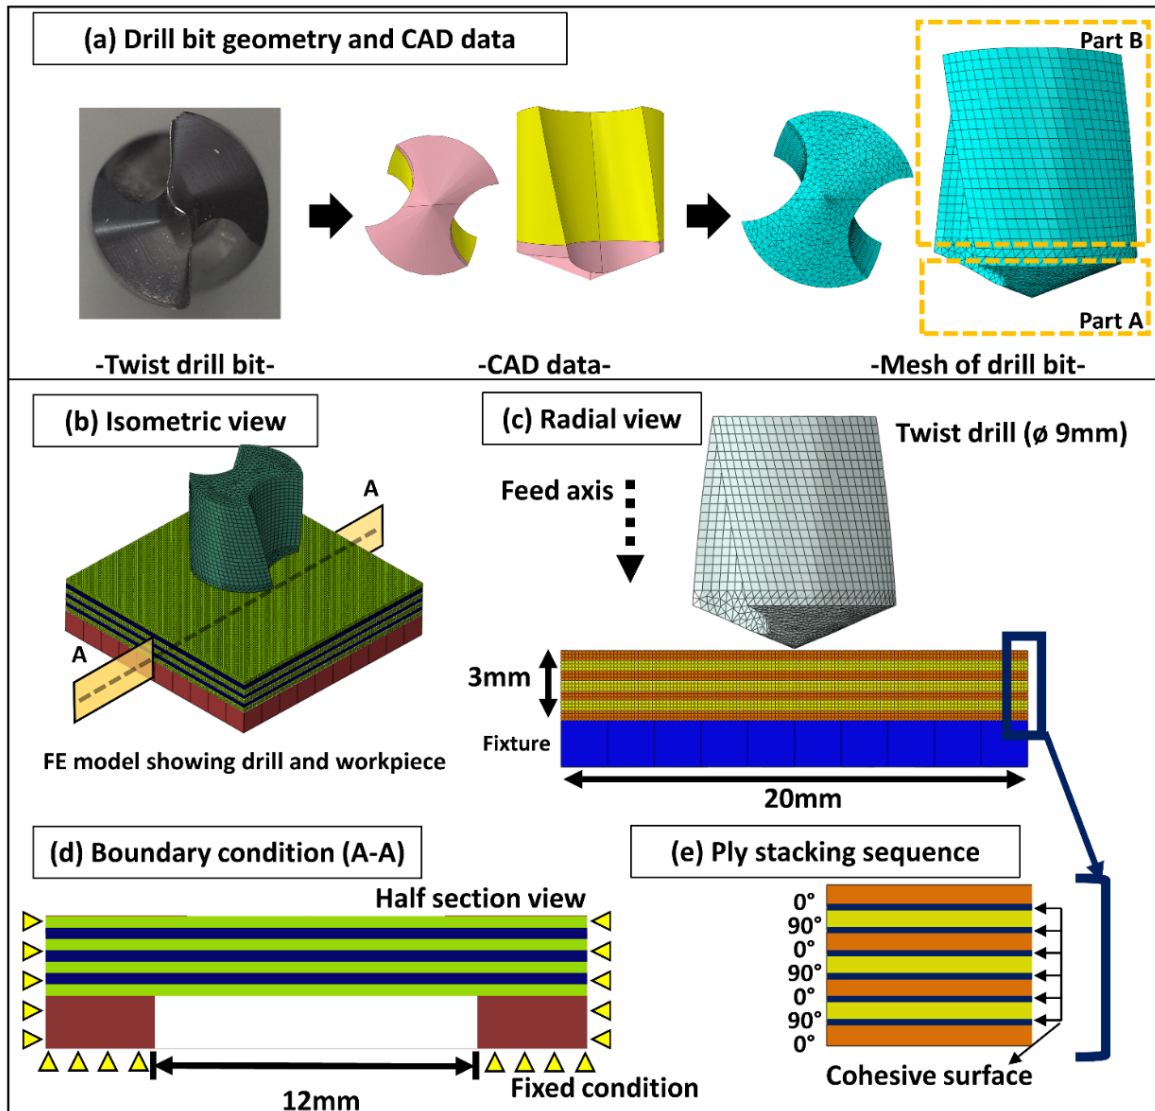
FE model setup for (a) Drill bit (b) Isometric view (c) Radial view with dimensions (d) boundary condition with half section view (e) ply stacking sequence with the cohesive surfaces
